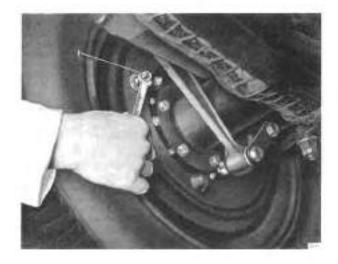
Adjustment of rear brakes 1 REAR BRAKE ADJUSTING SCREW
